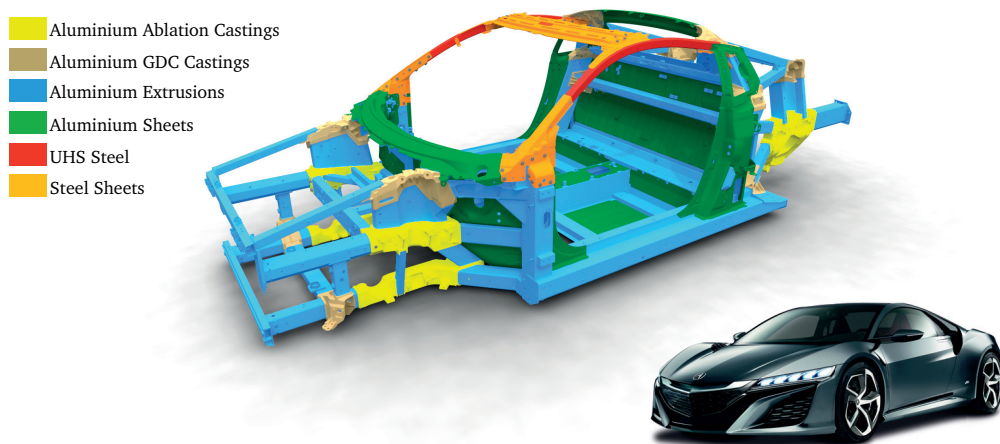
Material usage in the space frame of the Honda NSX 2016. Image courtesy of Honda R&D Americas, Inc. Embedded photo from pngpix.com [1].
